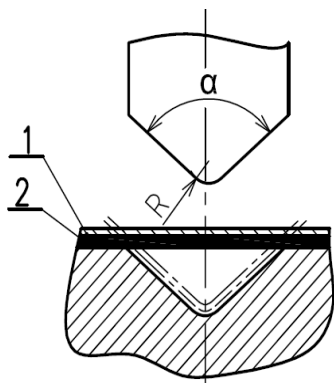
Scheme of bending sheet metal surface treated (bend to V) 1 - base material 2 - coat
